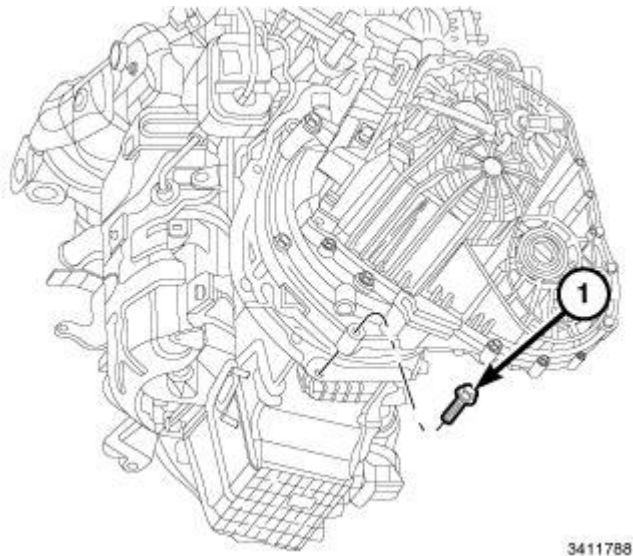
Support Bracket-To-Engine Mount Bracket Nut, Rear Mount & Bolt
